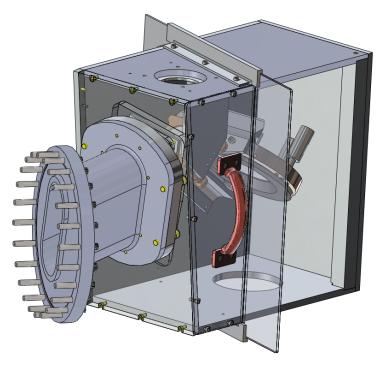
Isometric view of the H1-L1 viewport enclosure D1101627-v1, Type -01.
